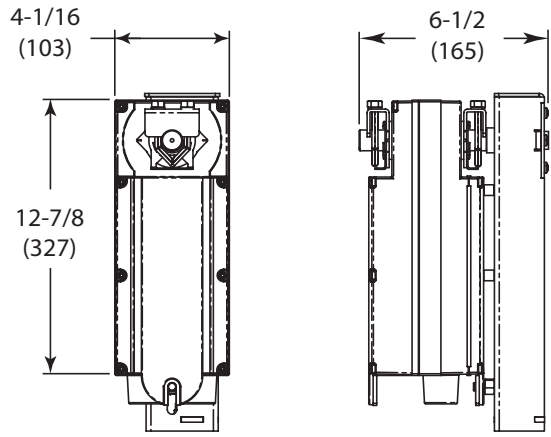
Mx40-717x-220 Actuator/Linkage Assembly
